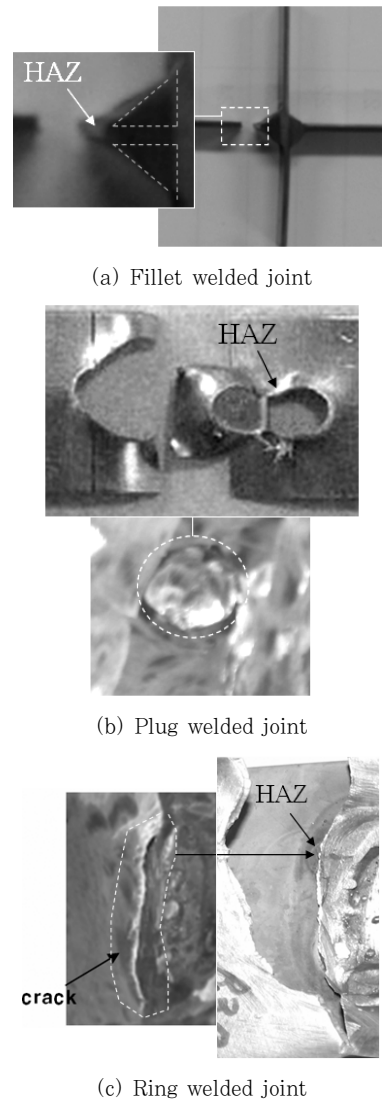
Failure location appeared on the various gas welded joints
